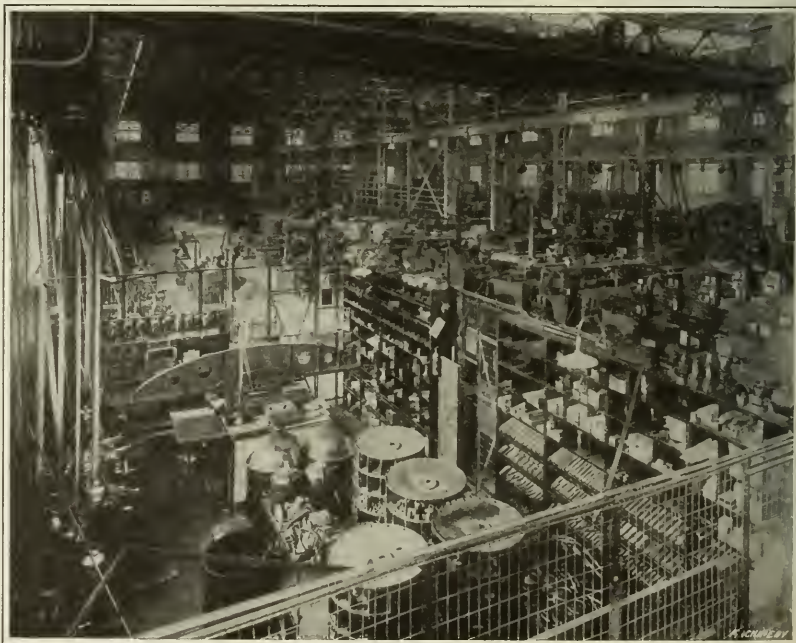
View of Tool-room which is fully equipped with Tools and Supplies for re-manufacturing Machine Tools
